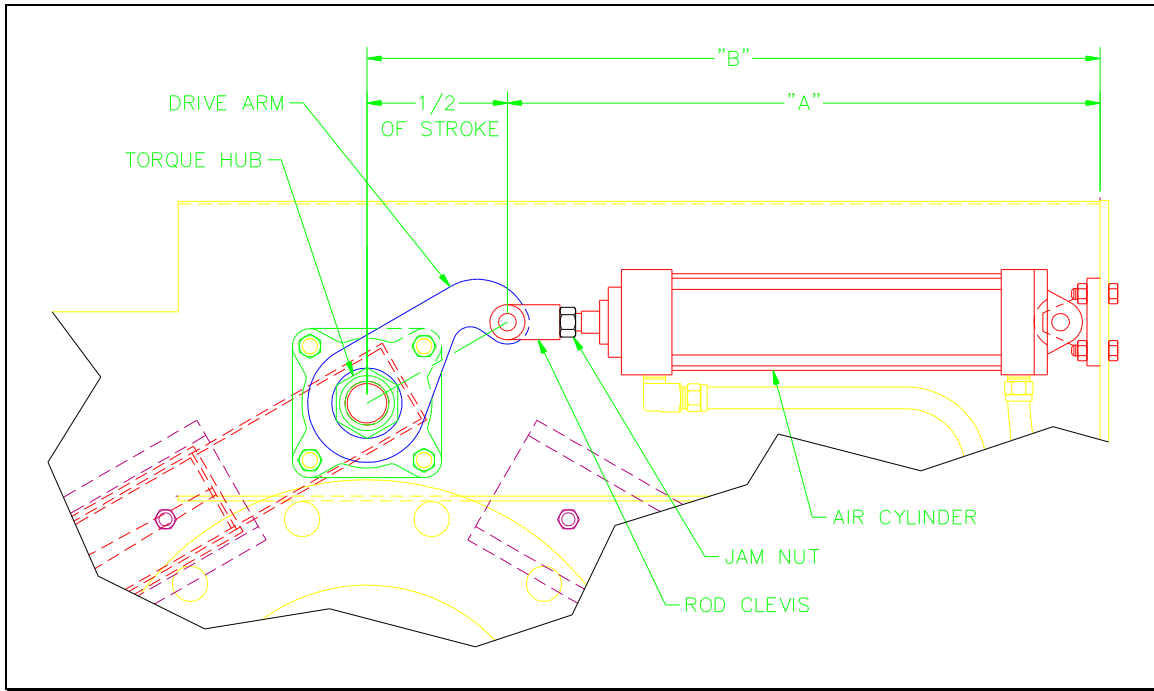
, GRA DRIVE ARM & TORQUE HUB
